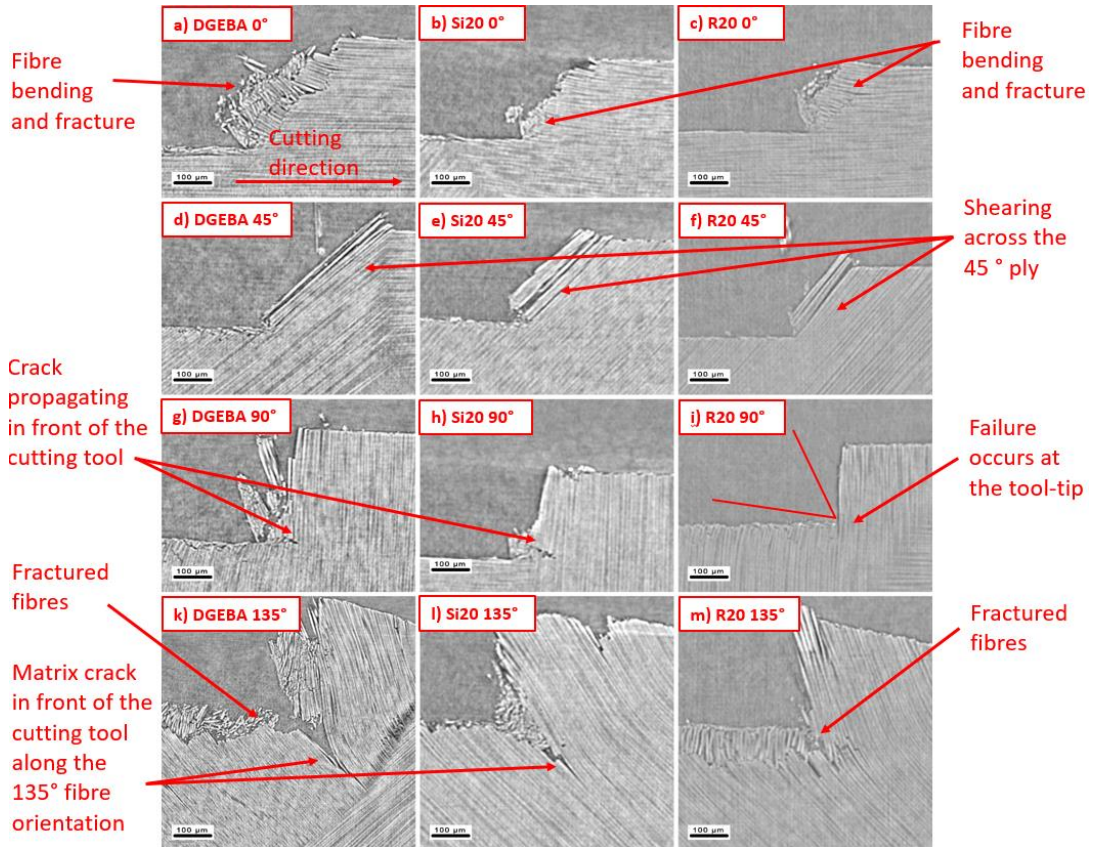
2D slice examples of interrupted cutting for DGEBA (a, d, g, k), Si20 (b, e, h, l) and R20 (c, f, i, m) samples showing machining induced damage
